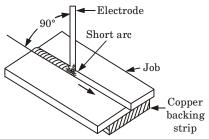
Metallic arc welding of aluminum.
